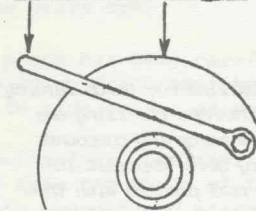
REMOVING THE CROWN WHEEL/DIFF. CAGE BOLTS.
